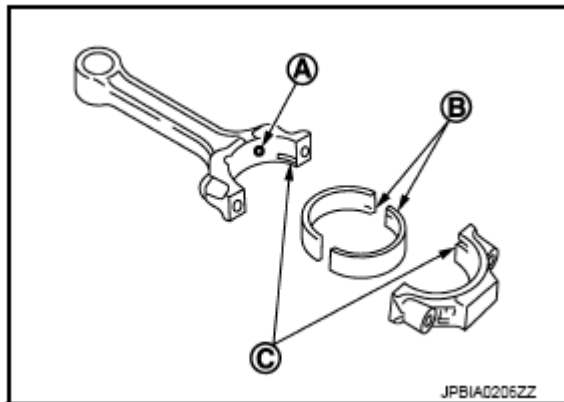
Identifying Connecting Rod Bearing Stopper Protrusion With Cutout And Oil Hole
